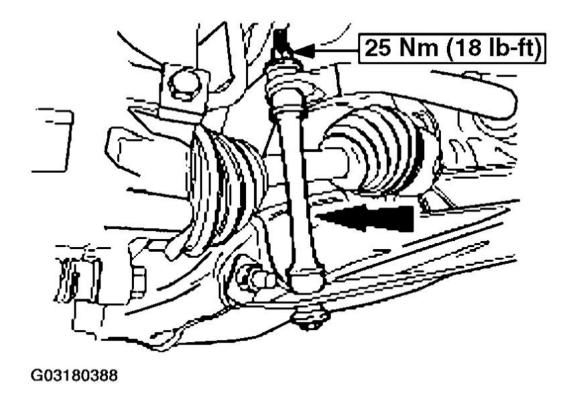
Removing Nut And Stabilizer Bar Link Courtesy of FORD MOTOR CO.
